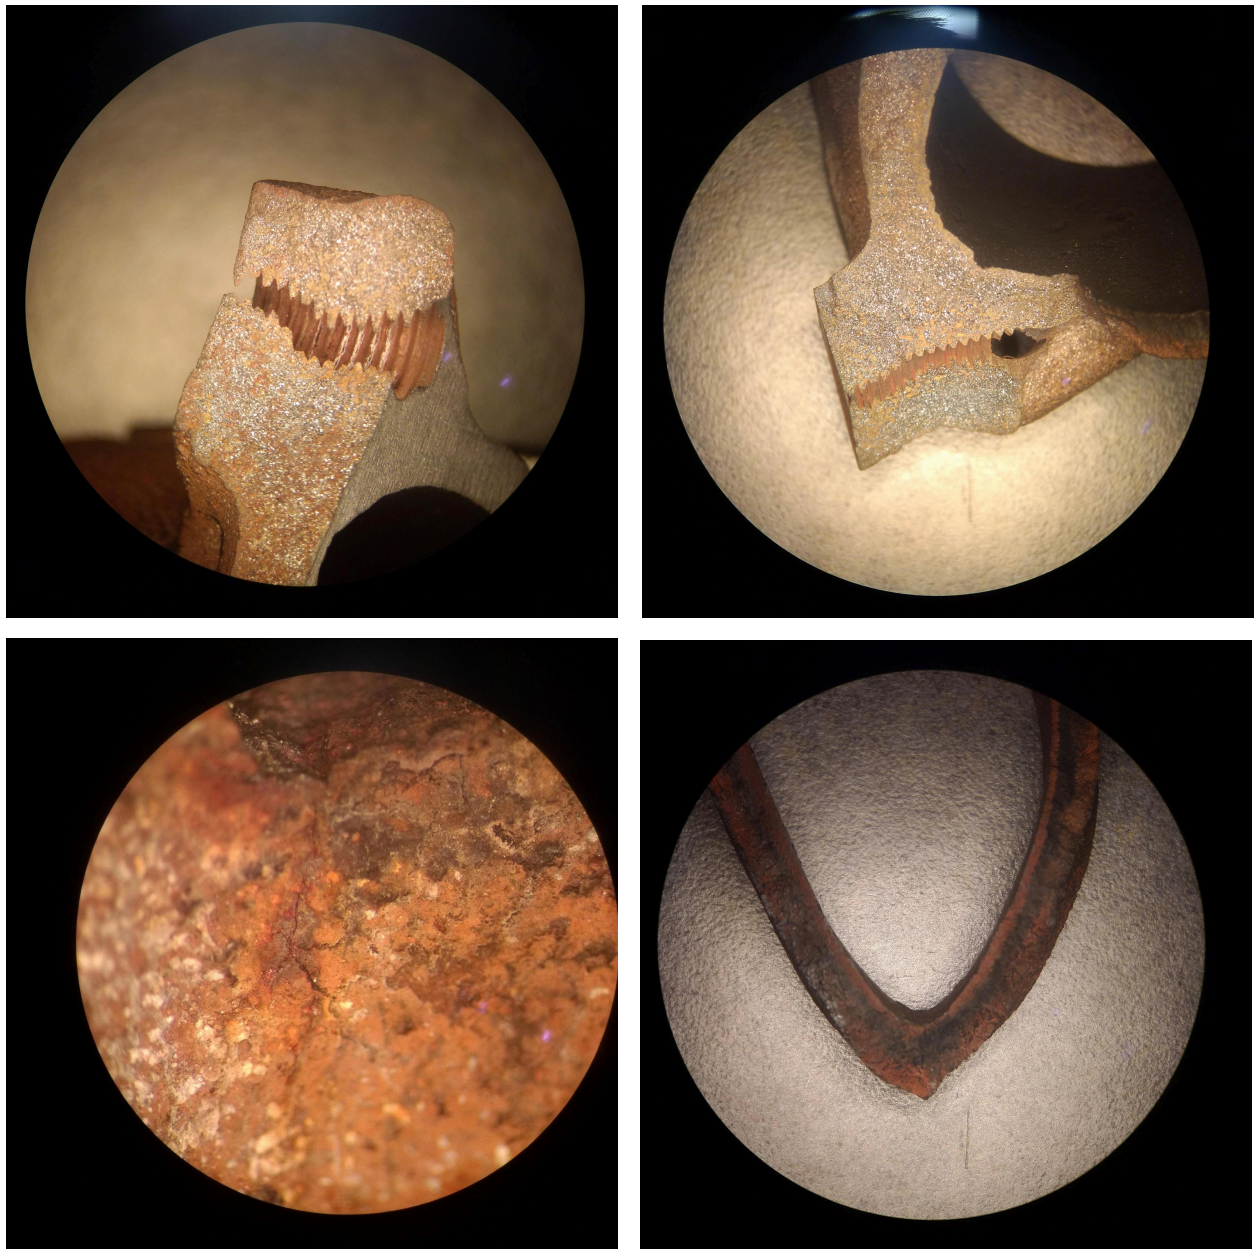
Stereo microscopy of different fracture surfaces
